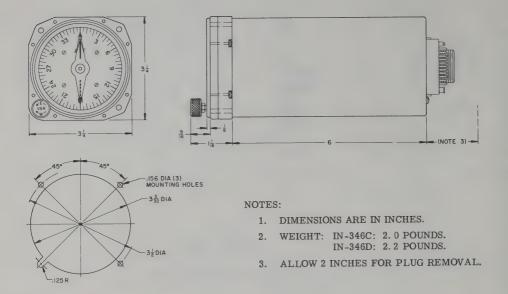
IN-346C and IN-346D Goniometer-Indicators, Installation Dimensions
